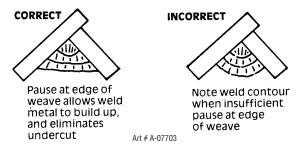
Examples of Vertical Fillet Welds
